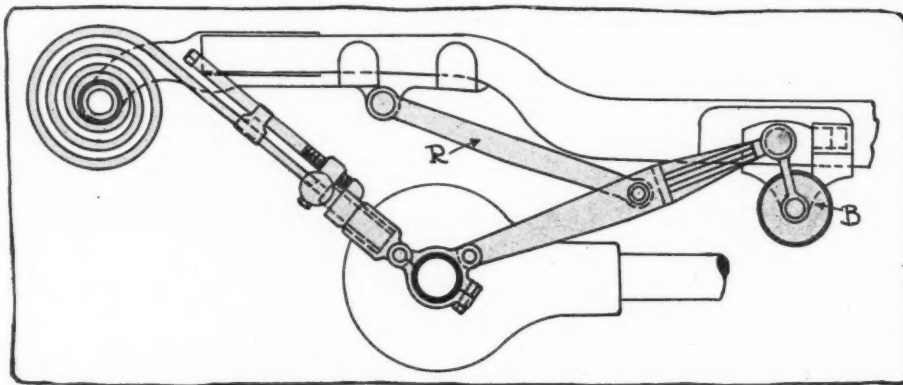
Eastman spring suspension. It embodies a spiral spring and a shock absorber
